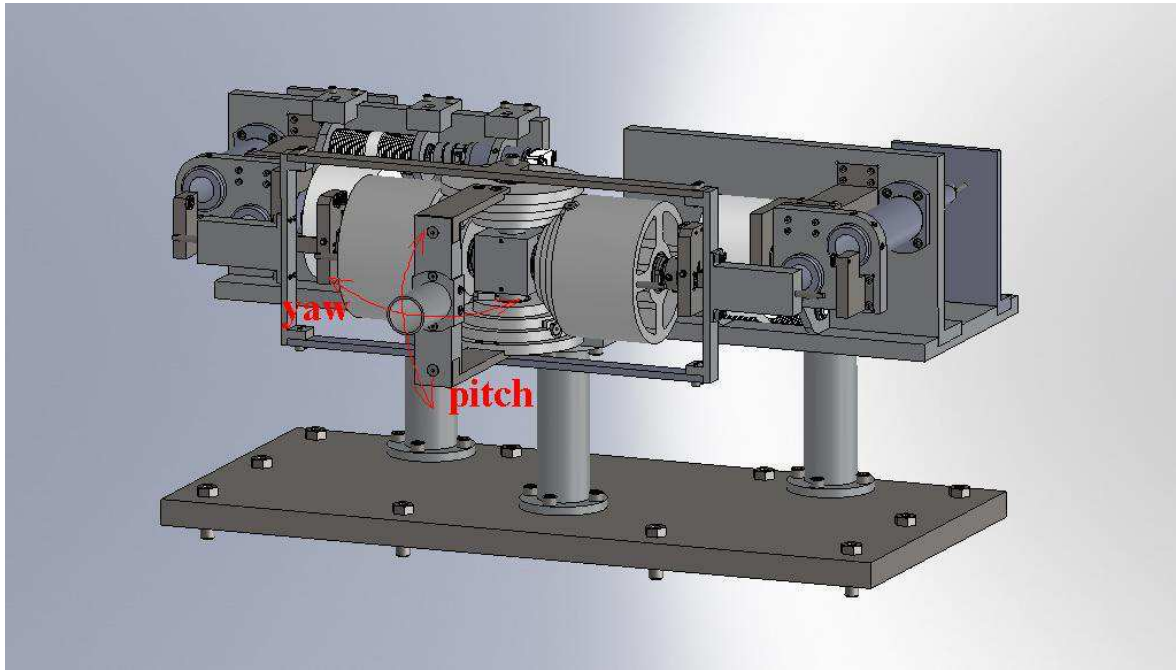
CAD drawing of the prototypical two DOF cable-pulley driven flexible joint robot.
